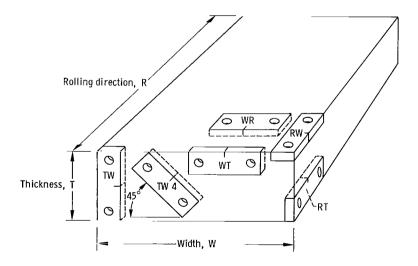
Schematic drawing of crack orientations investigated by using single-edge-crack specimens. (See fig. 3 for location of cracks with respect to product form cross section.)
